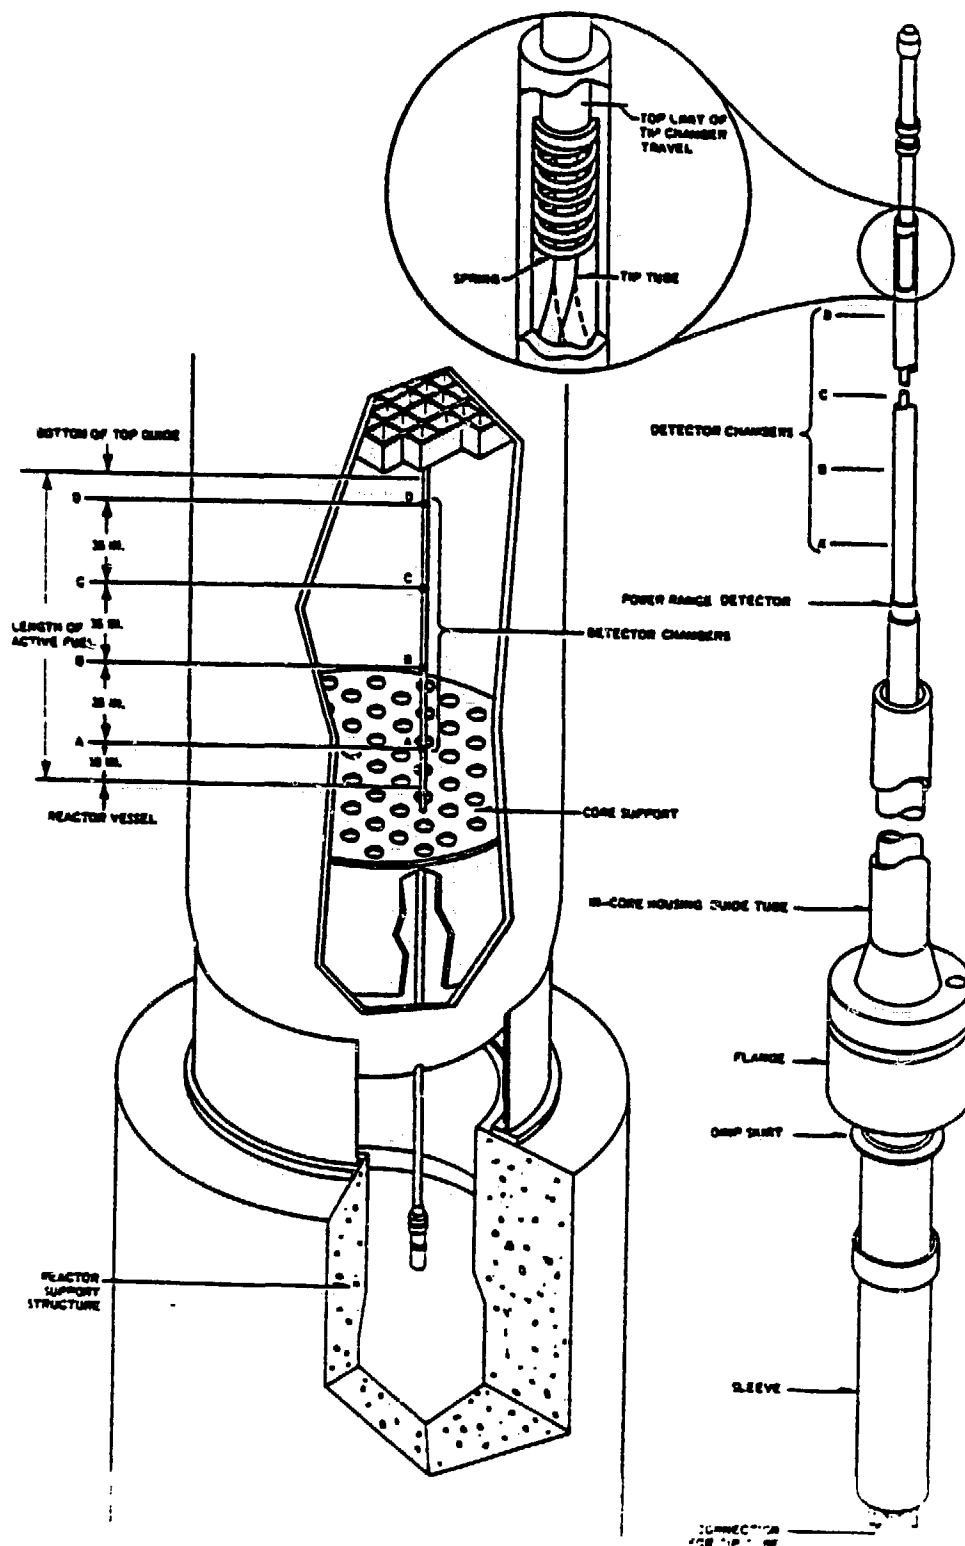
Mechanical arrangement of one of the 43 Local Power Range Detector assemblies. The annular gap clearance between the in-core housing guide tube and the instrument tube is specified as 0.40 inches.
